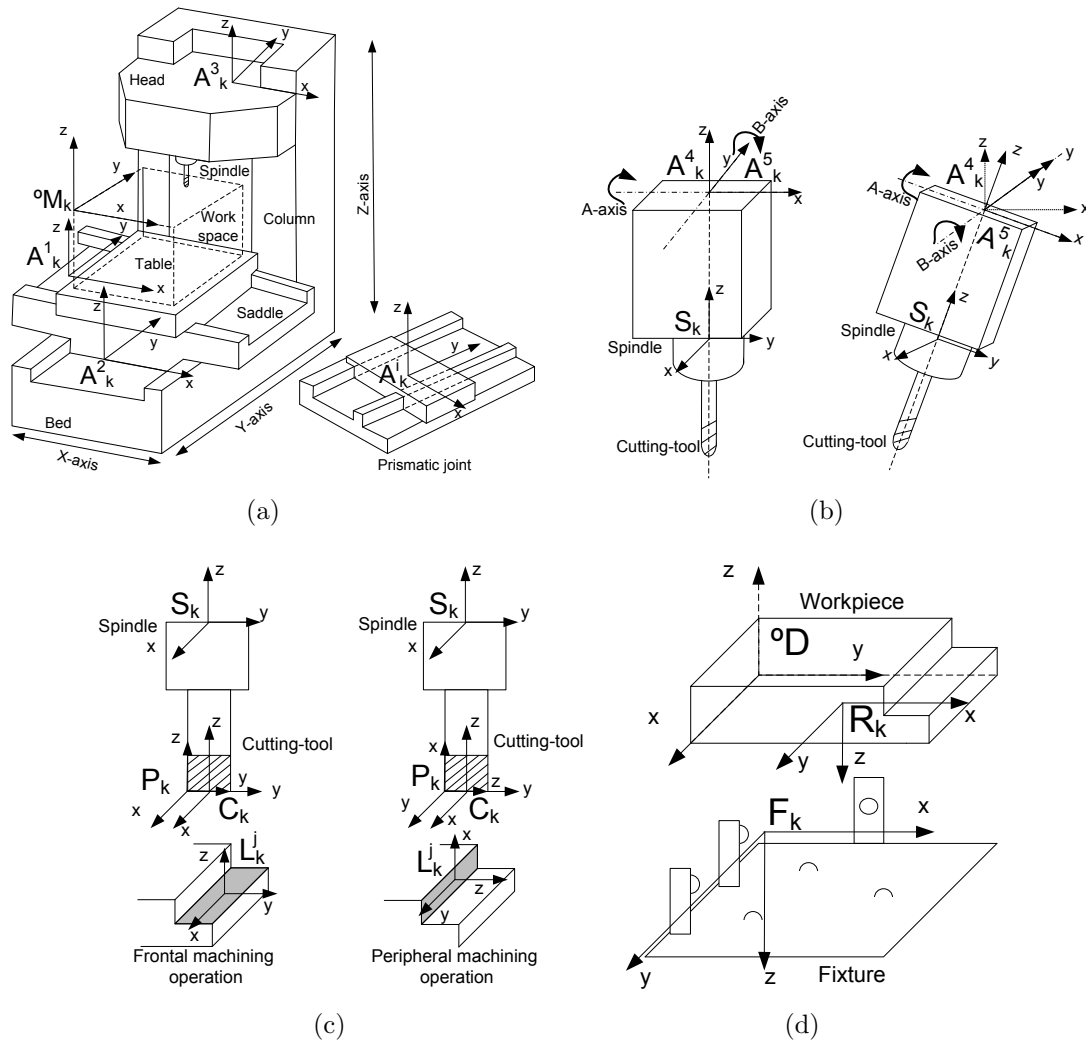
Example of the CSs involved in a 5-axis CNC machine-tool (type X-Y-Z-A-B).
